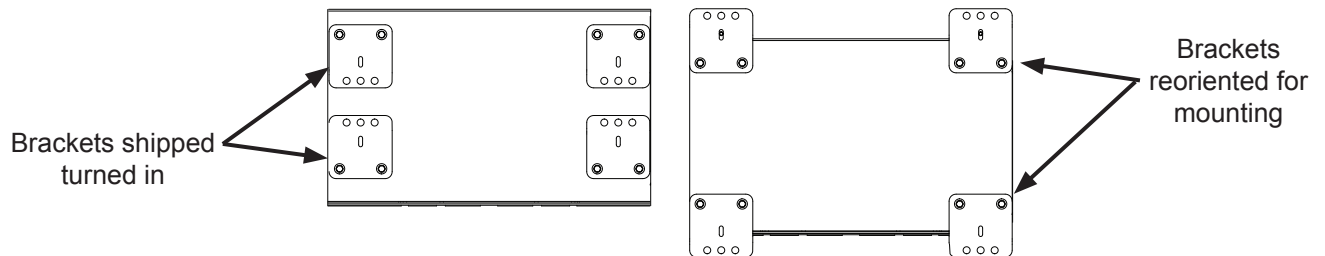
, FBE2322-AEE Example of Hardware Position for Shipping - Rear View
